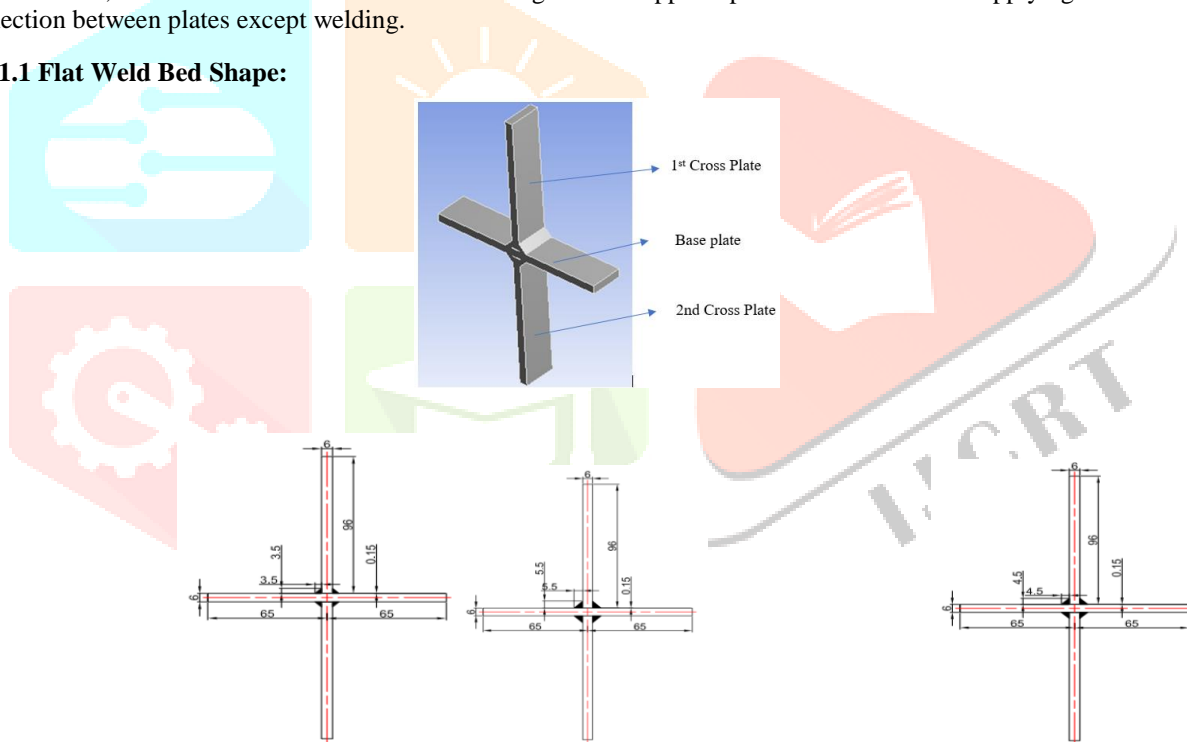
Cruciform Weld Joint: Flat welded joint geometry for a. 3.5x3.5, b. 4.5x4.5 and c. 5.5x5.5 with considered dimensions.
